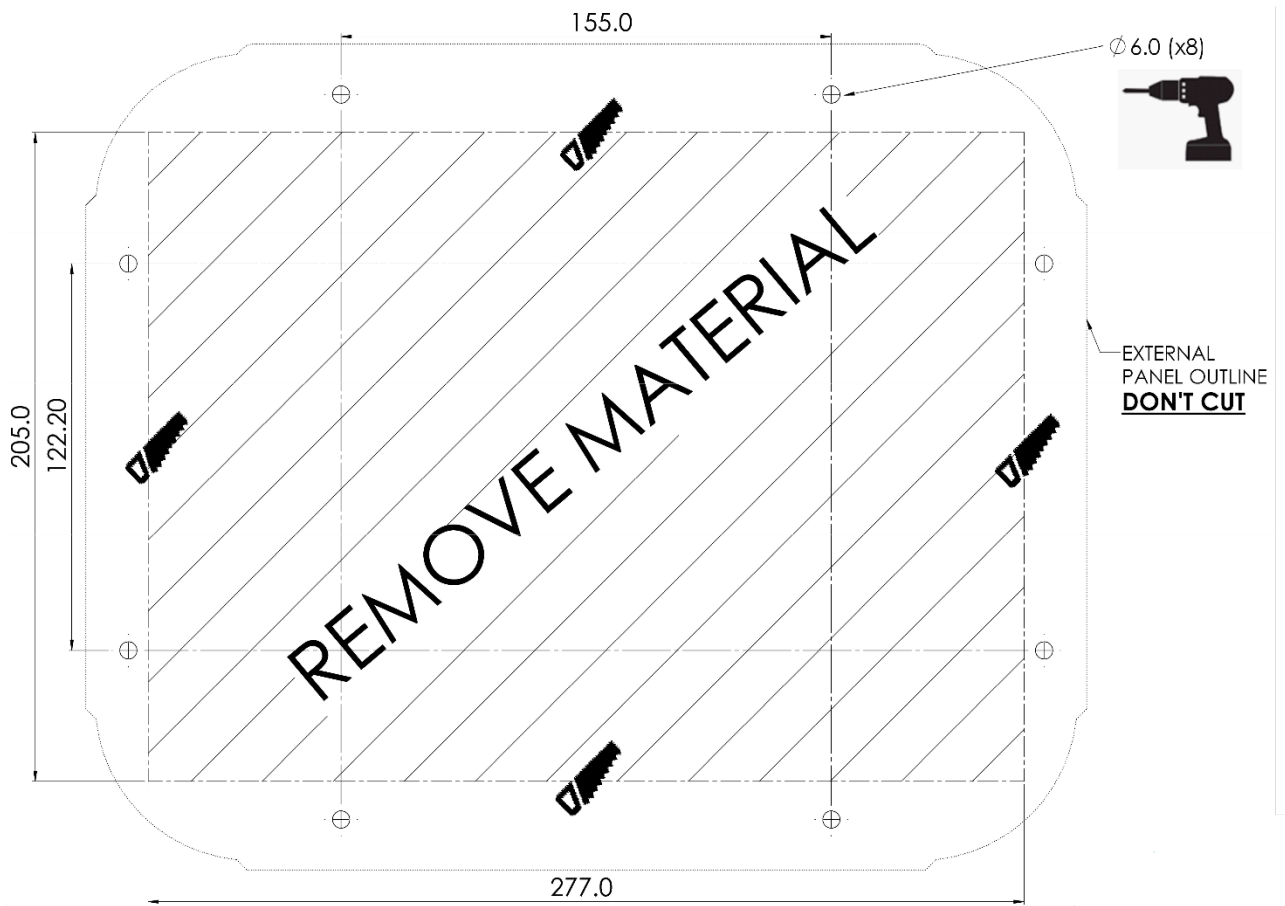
Panel Cutting and Drilling Dimensions (millimeters)
